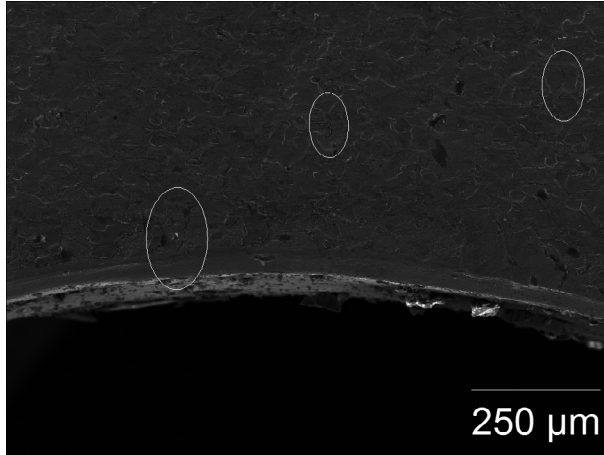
View of surface – sample made of S235JR steel – cracks are marked
